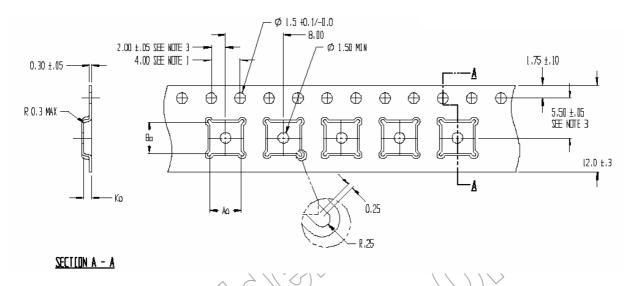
QN8006/8006L-B Carrier Tape Dimensions
